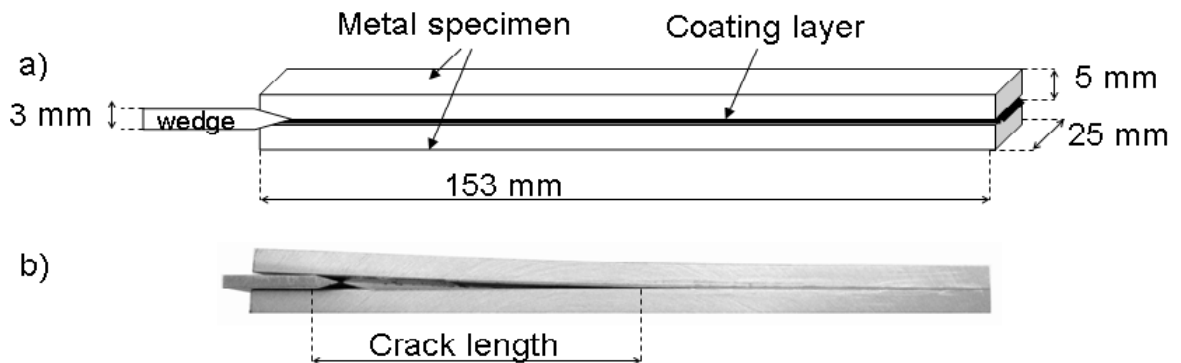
a) Typical DCB specimen geometry before and b) after insertion of the wedge.
